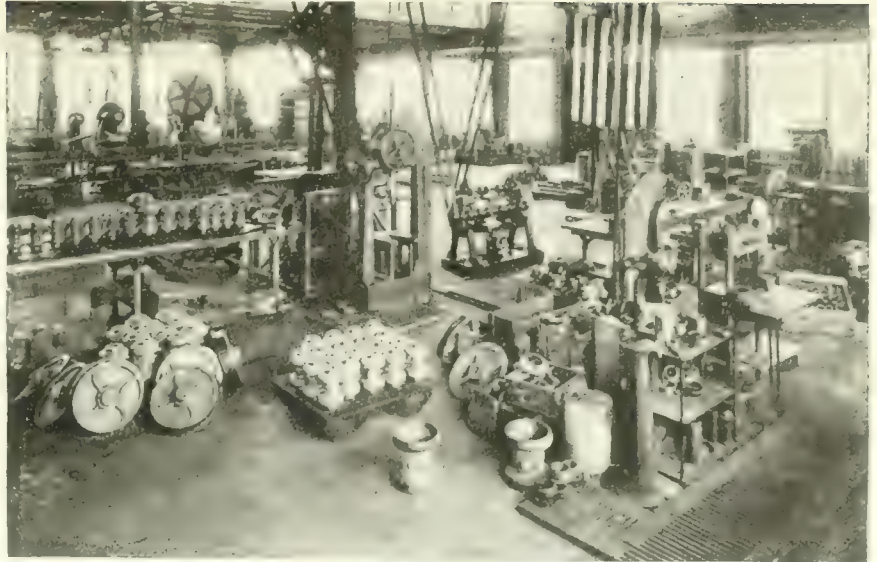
FINAL TEST DEPARTMENT WHERE BEARINGS ARE ADJUSTED AND RUN UNDER SPECIFIED LOADS, ETC.
